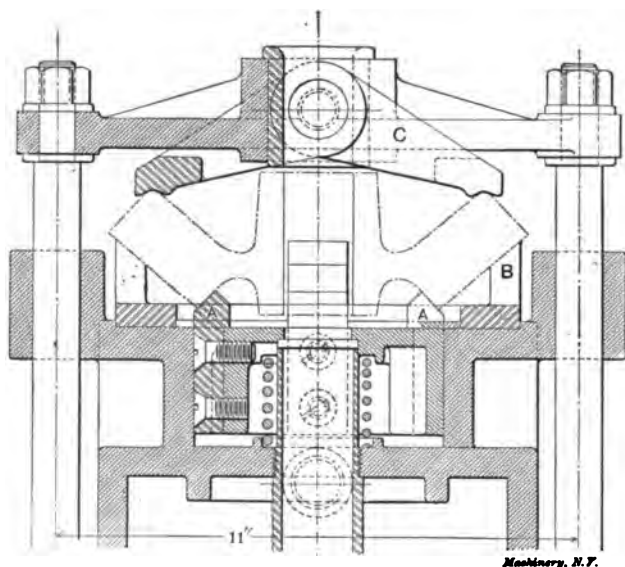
Vertical Section of Pneumatic Jig Fitted with Equalizing Centering Device
